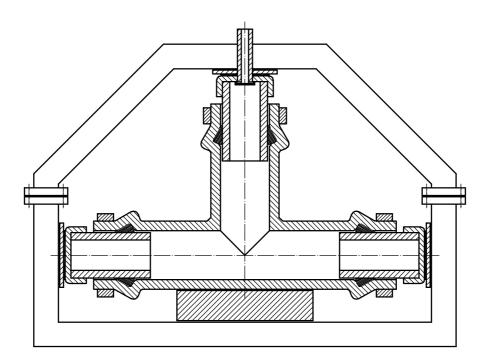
Example of pressure-tight test piece using devices involving external frame and without hydrostatic end thrust
